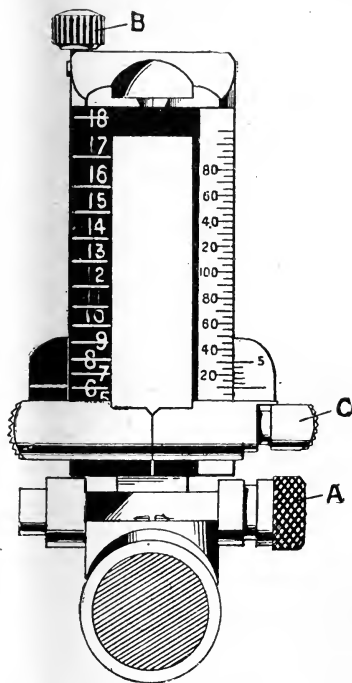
PIVOT WIND-GAUGE SIGHT AND VERNIER ELEVATING SLIDE.
